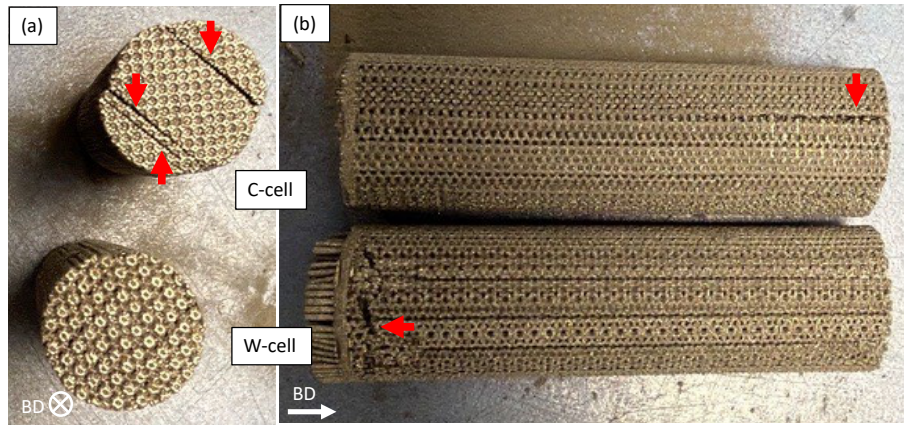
(a) Top and (b) side views of C-cell (top) and W-cell (bottom) tensile lattice specimens tested without solid caps. Red arrows show location of fractures.
